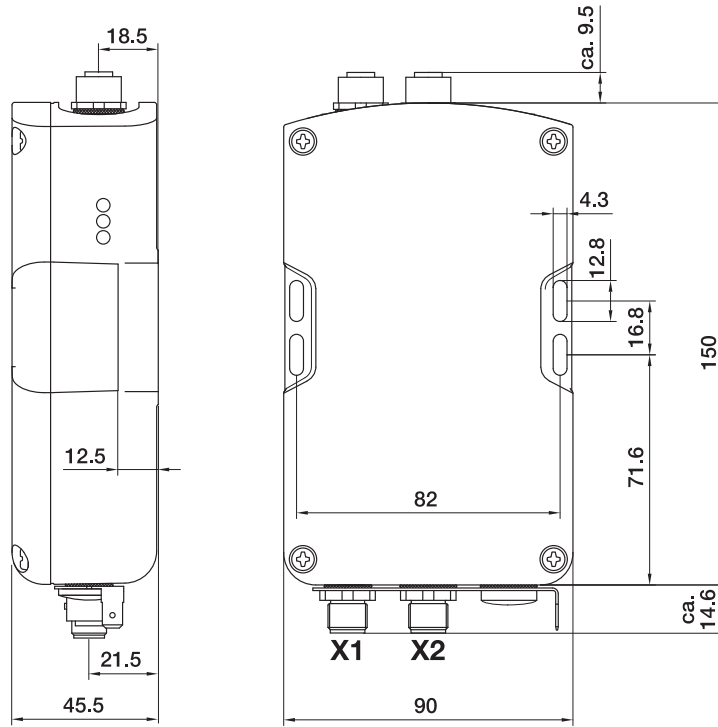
Mechanical connection BIS M-6000-007-050-00-ST15 (dimensions in mm)
